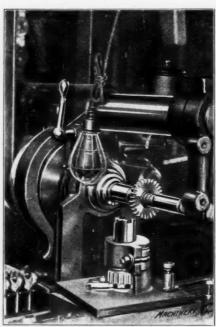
Milling Clutch Teeth in the Drive-shaft End of the Sleeve
